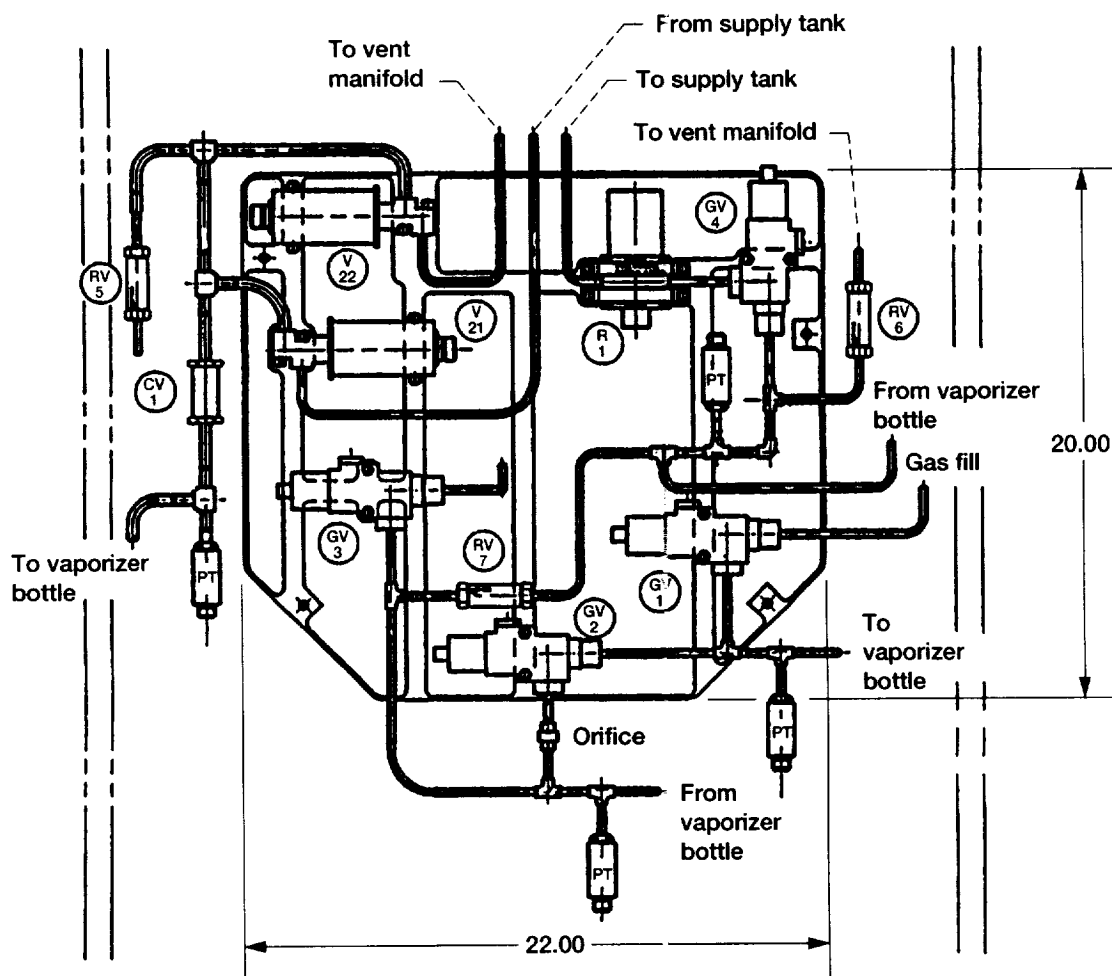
Vaporizer valve panel layout (valve panels B and C). Dimensions are in inches.
